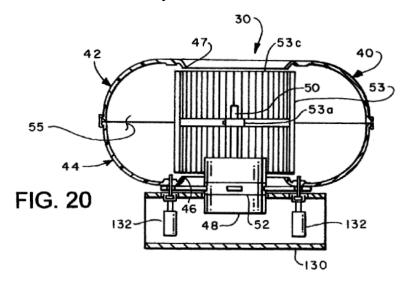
shows a fan assembly containing a motor and a blower housing 40 made of two parts 42 and 44, and a seam were part 42 and 44 meet along the parting line. *See* 4:32–42, 7:55–56; *see* Final Act. 4.
